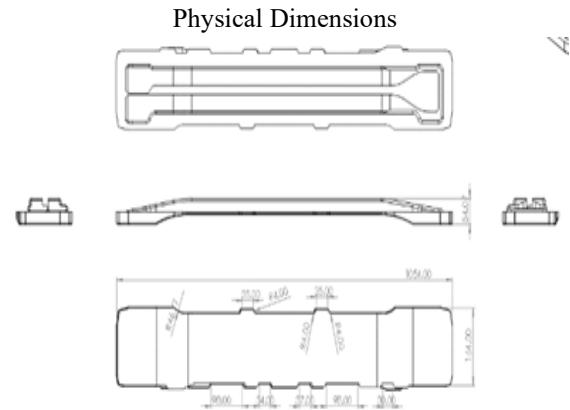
D Drawing and Dimensions of Maruti Suzuki Ertiga Existing Bumper Beam.
